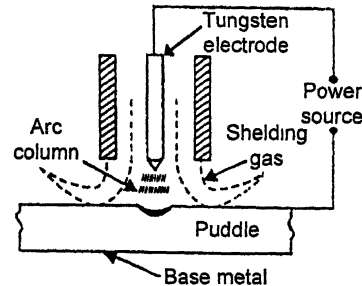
Tungsten inert-gas (TIG) welding.
